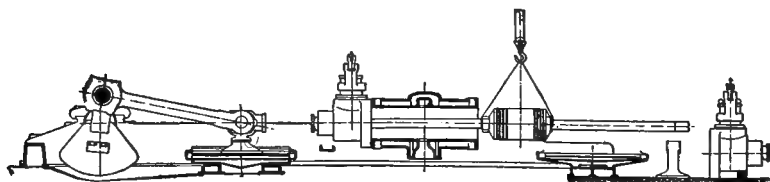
Removing Piston in Double-Acting Two-Cycle Engine.
